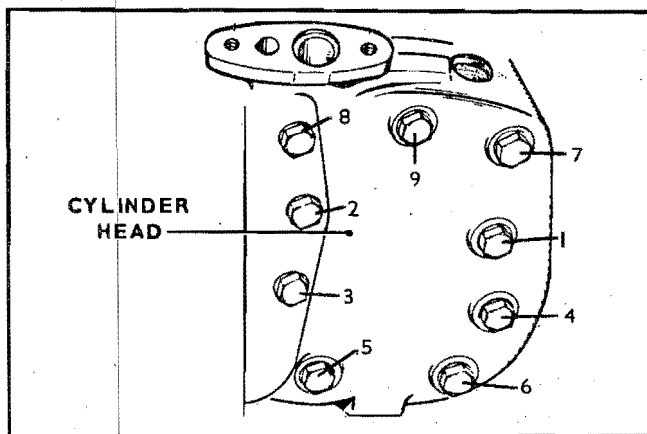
CYLINDER HEAD BOLT TORQUE SEQUENCE
